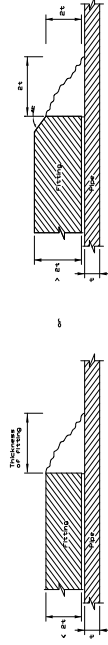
Dimension of fillet leg length to suit thickness of fitting
